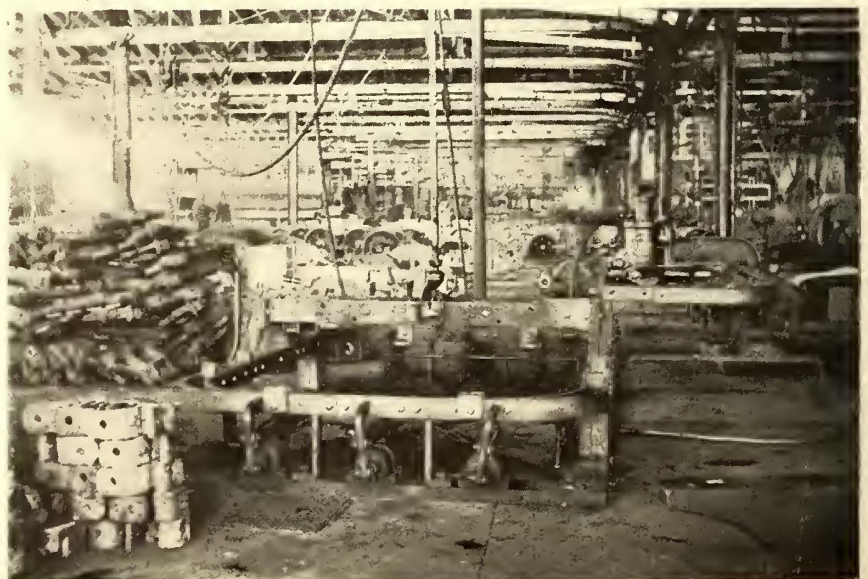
PNEUMATIC ASSEMBLERS AND RIVETER
